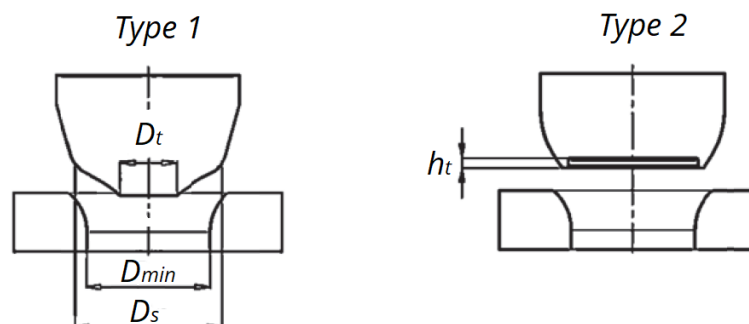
Geometrical parameters and shapes of the main plug;
